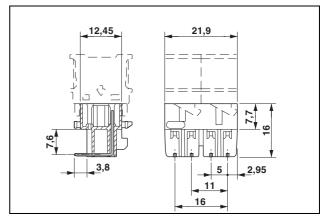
Dimensions of header HSCH 2,5-2U-TTTT 9005
